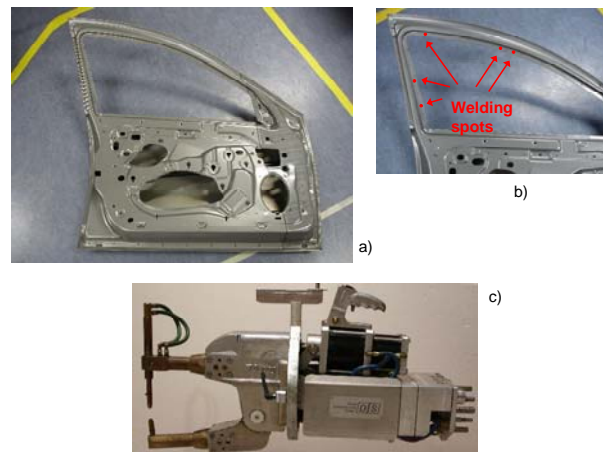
a) Car body door used as work piece in welding gun scenario. b) Positions of the spots to be welded indicated on the car door. c) Welding gun.
